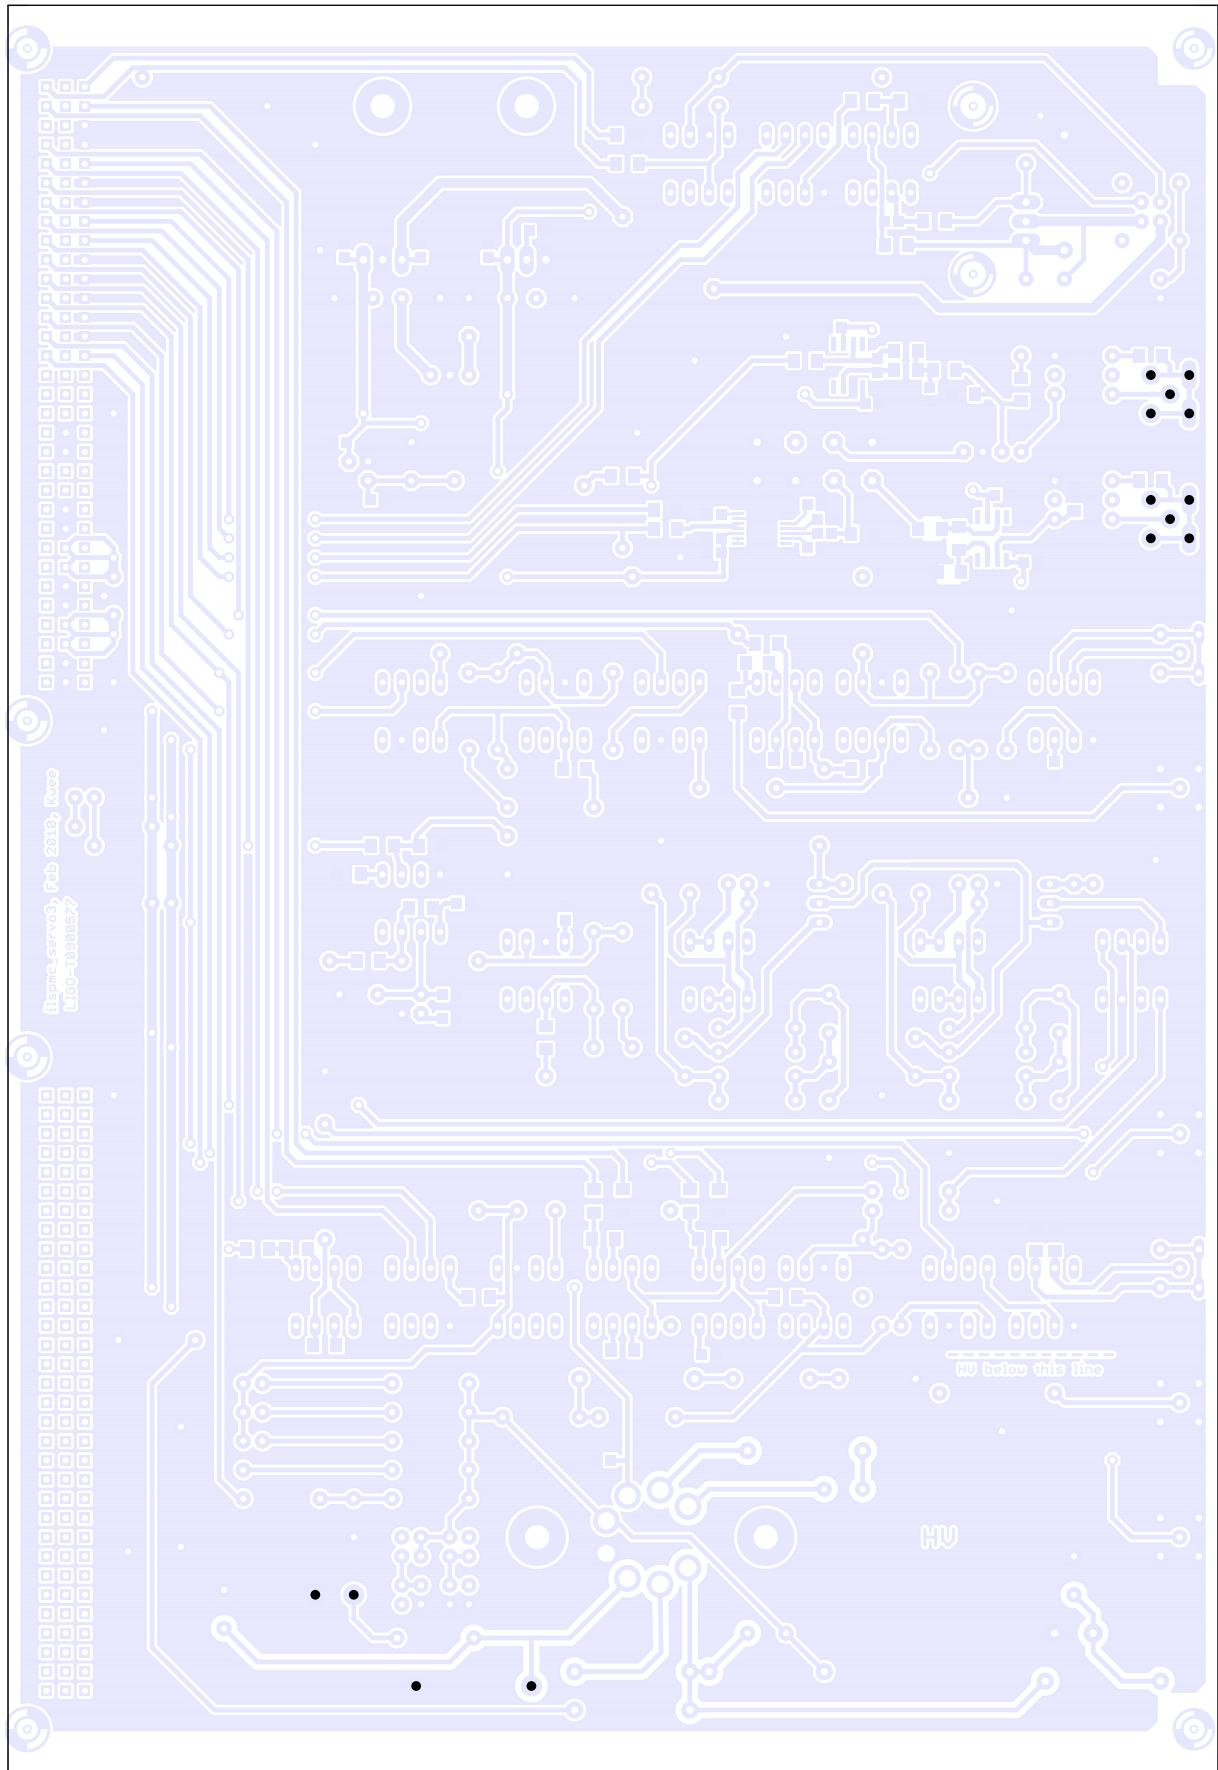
Board bottom view showing drills with 1.3 mm (0.051 in) diameter
